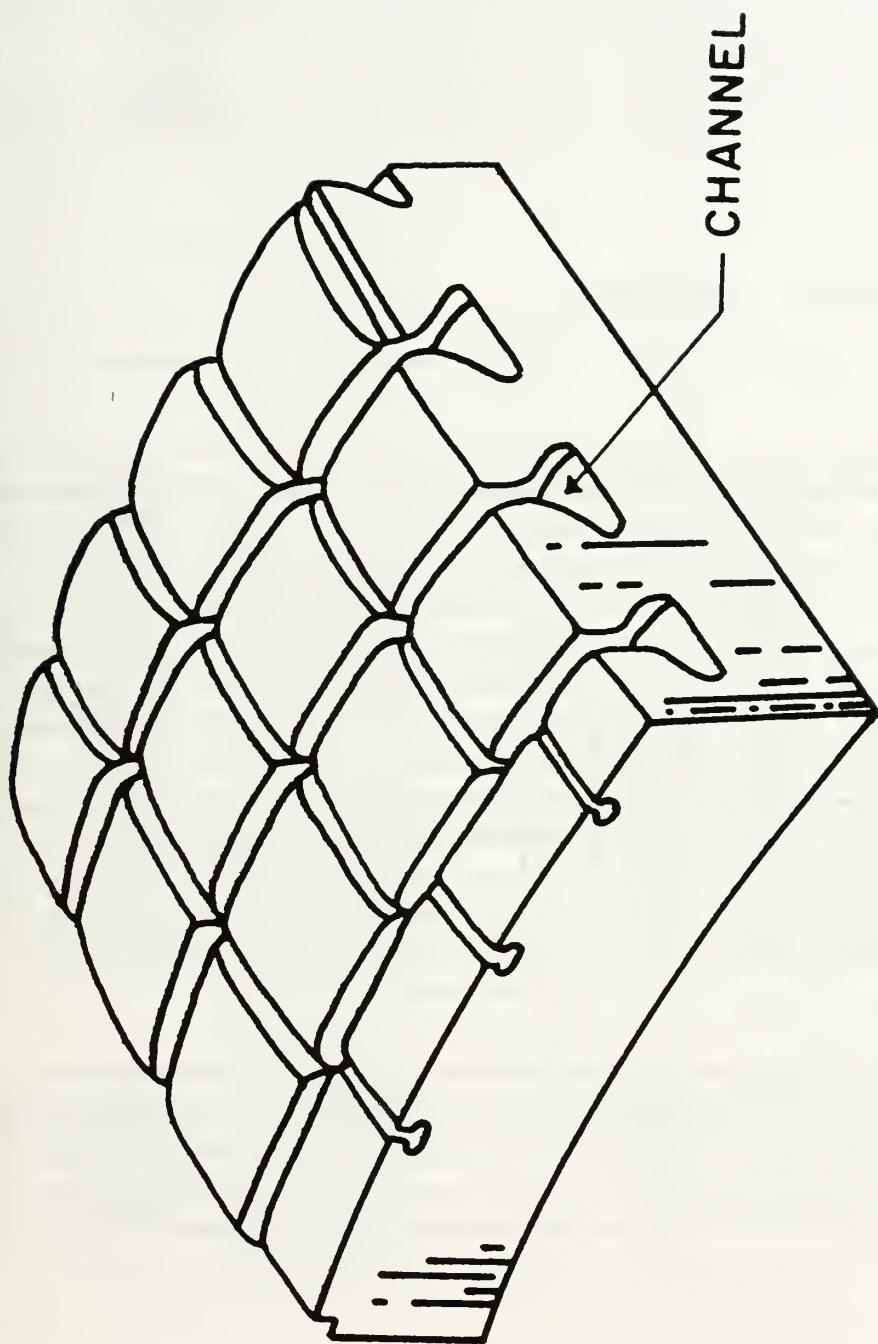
Close-up View of Turbo-B Tube Surface (25 X)
